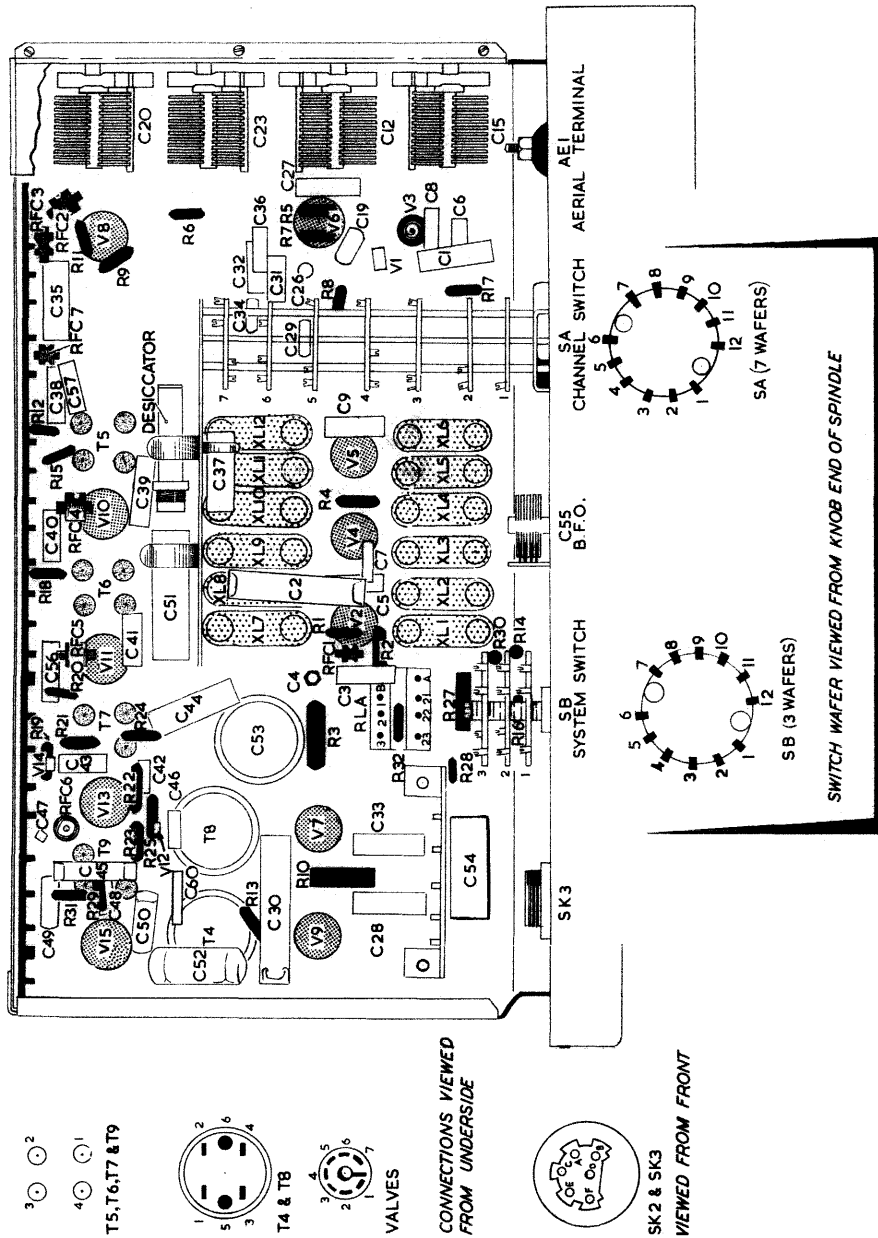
TRANSMITTER - RECEIVER: UNDERSIDE VIEW OF CHASSIS.
